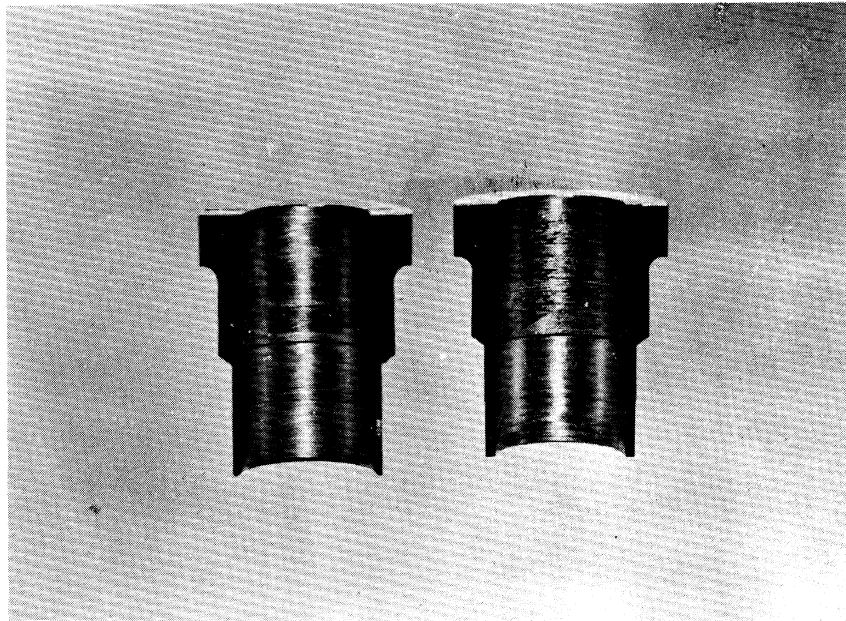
Material 222. View of drilled surface produced on piece No. 2 (left) and piece No. 1152 (right) before drill was replaced.
